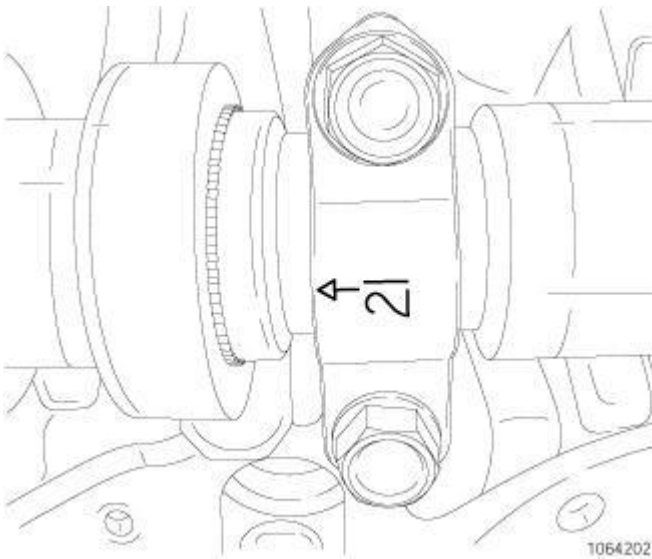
Positioning Camshaft Cap Arrow Toward Front Of Engine
